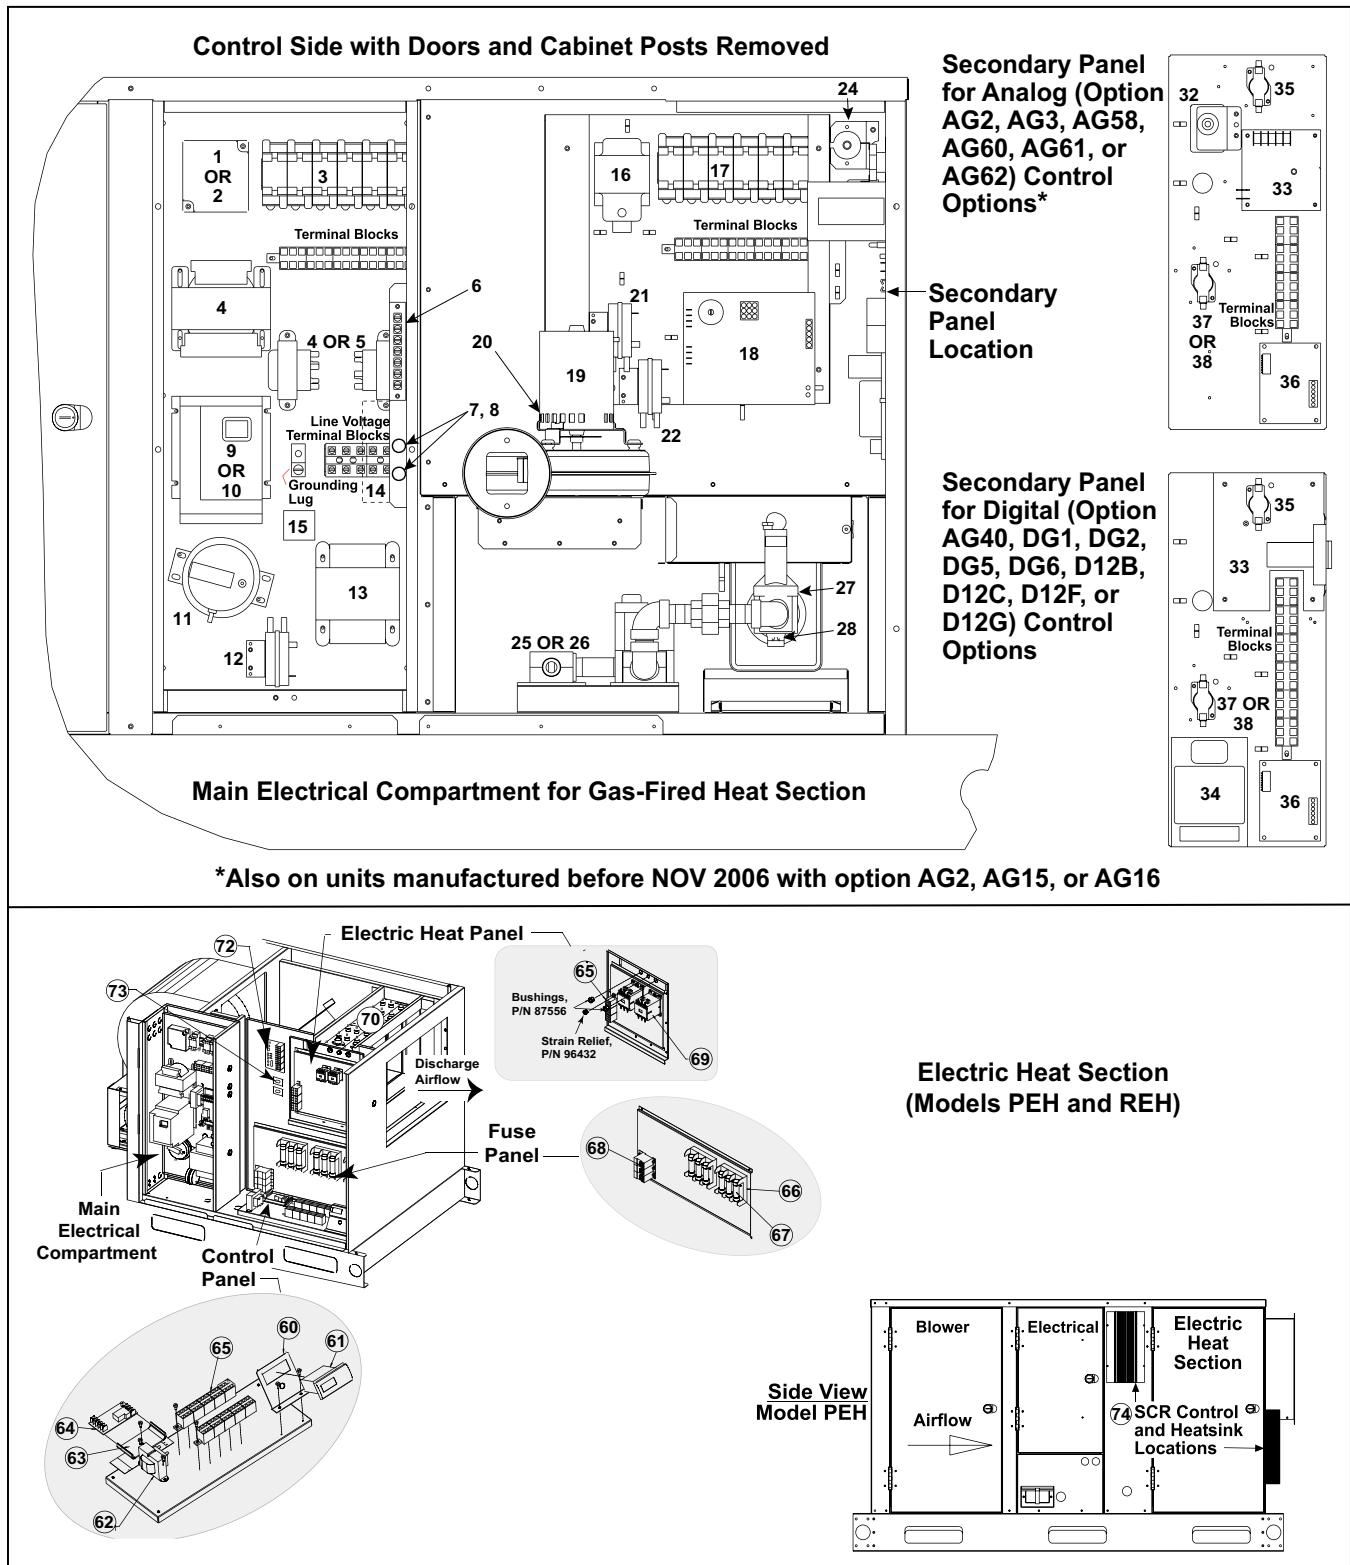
Electrical Component Locations (Refer to [Table 3](#))
